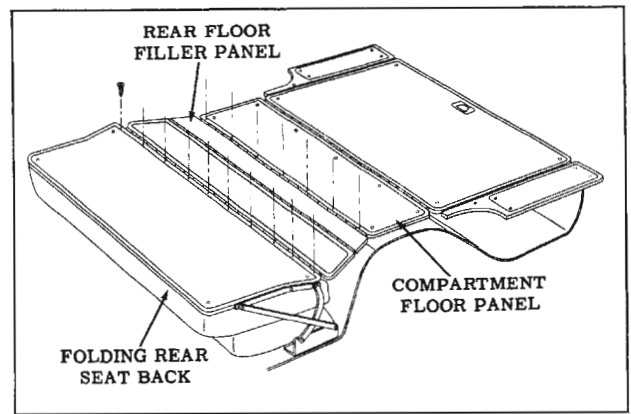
Folding Rear Floor Filler Panel Assembly
